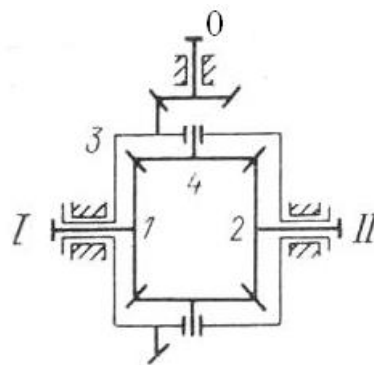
Differential: pinion (input) shaft 0, axle shaft (side) gears, 1,2, crown (ring) wheel 3, pinion gears 4
